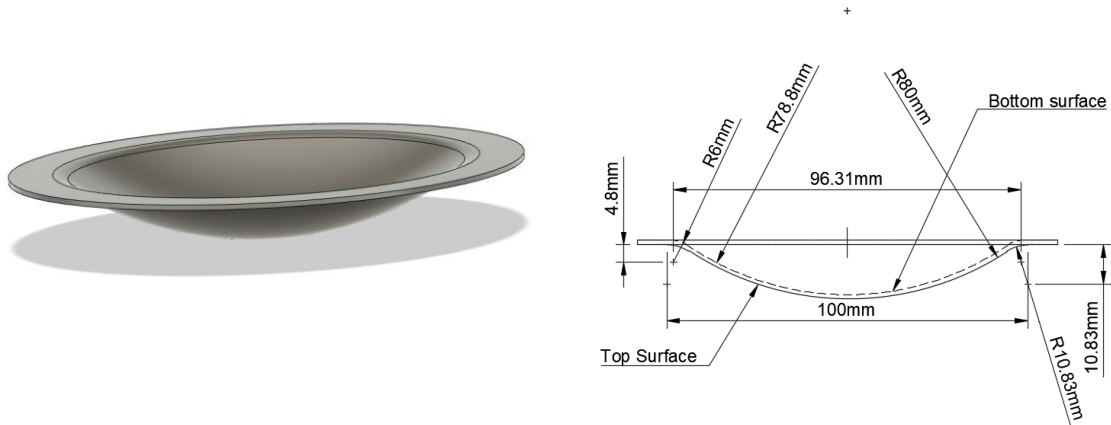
True CAD model of the dome: (Left) Isometric View; (Right) dimensional drawing showing the radius of the dome, radius of the fillet, and major diameter for both top and bottom surfaces.
